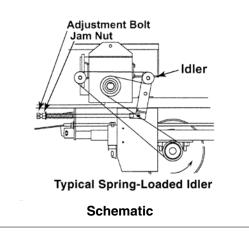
SPRING-LOADED IDLER SYSTEM (TYPICAL)
